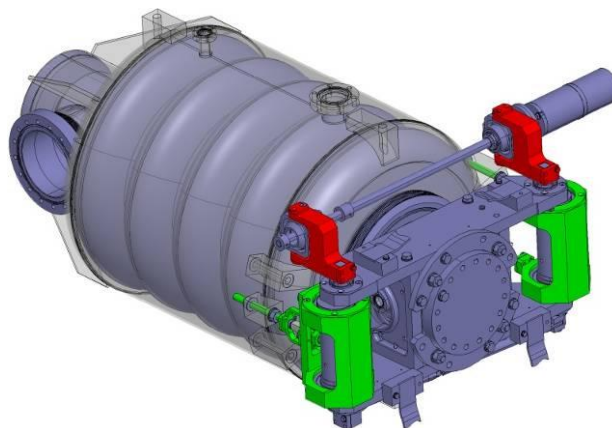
Elliptic B cavity equipped with He tank and piezo tuner
